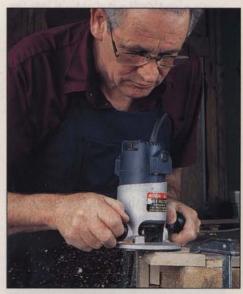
Photo B: Rout edge of top molded layer with 1/2"-radius beading bit (or a round-over bit with an undersized bearing).
